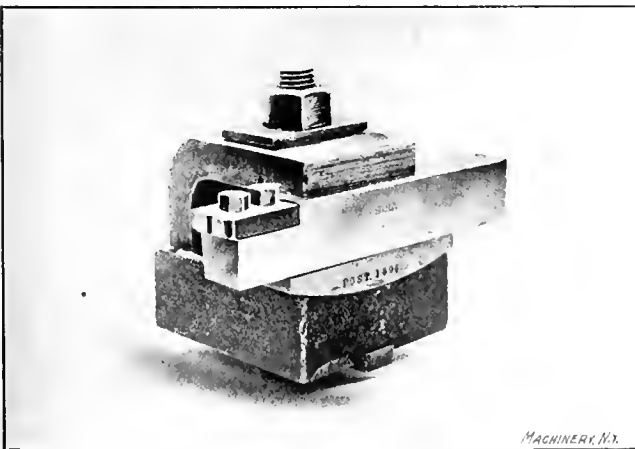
Separate Blade Formed Tool, with Open Faced, Rocking Holder
